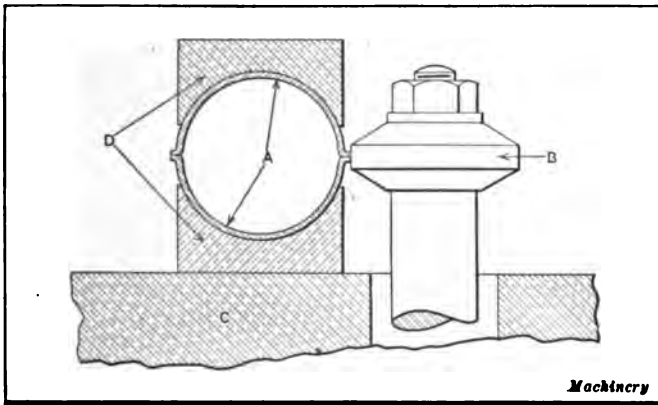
Diagram showing Method of welding Teapot Spouts on Machine shown in Fig. 2
